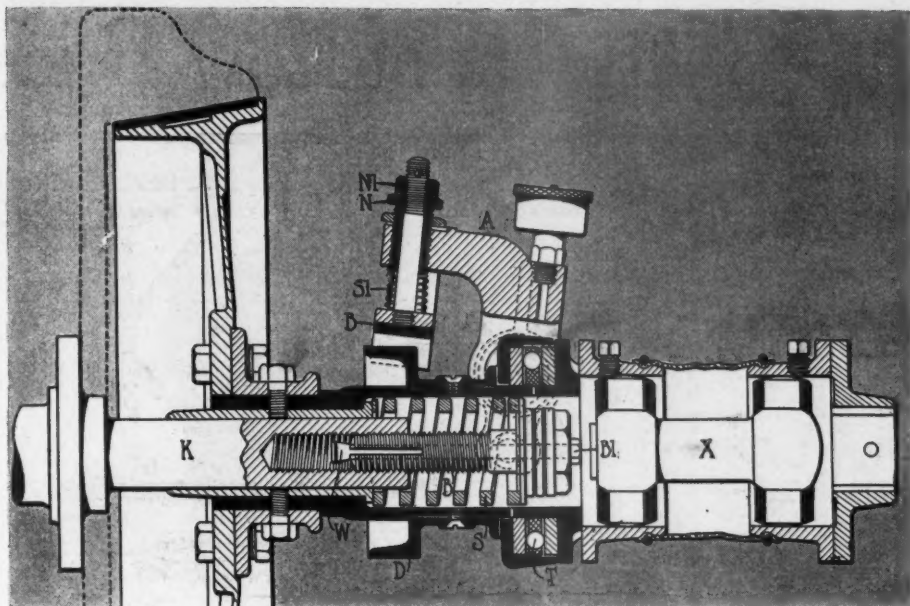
CLUTCH WITH NEW CLUTCH BRAKE
